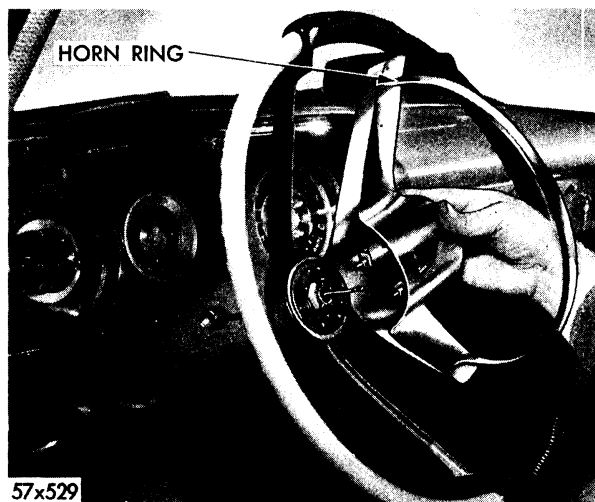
Removing or Installing Steering Wheel Horn Ring
